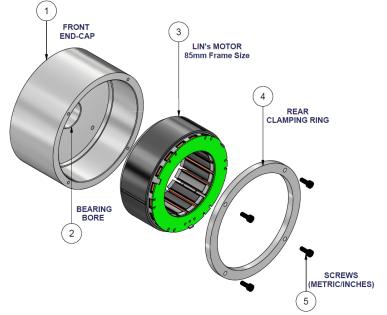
Exploded view of Stator to Housing Assembly with Axial Clamping Method
